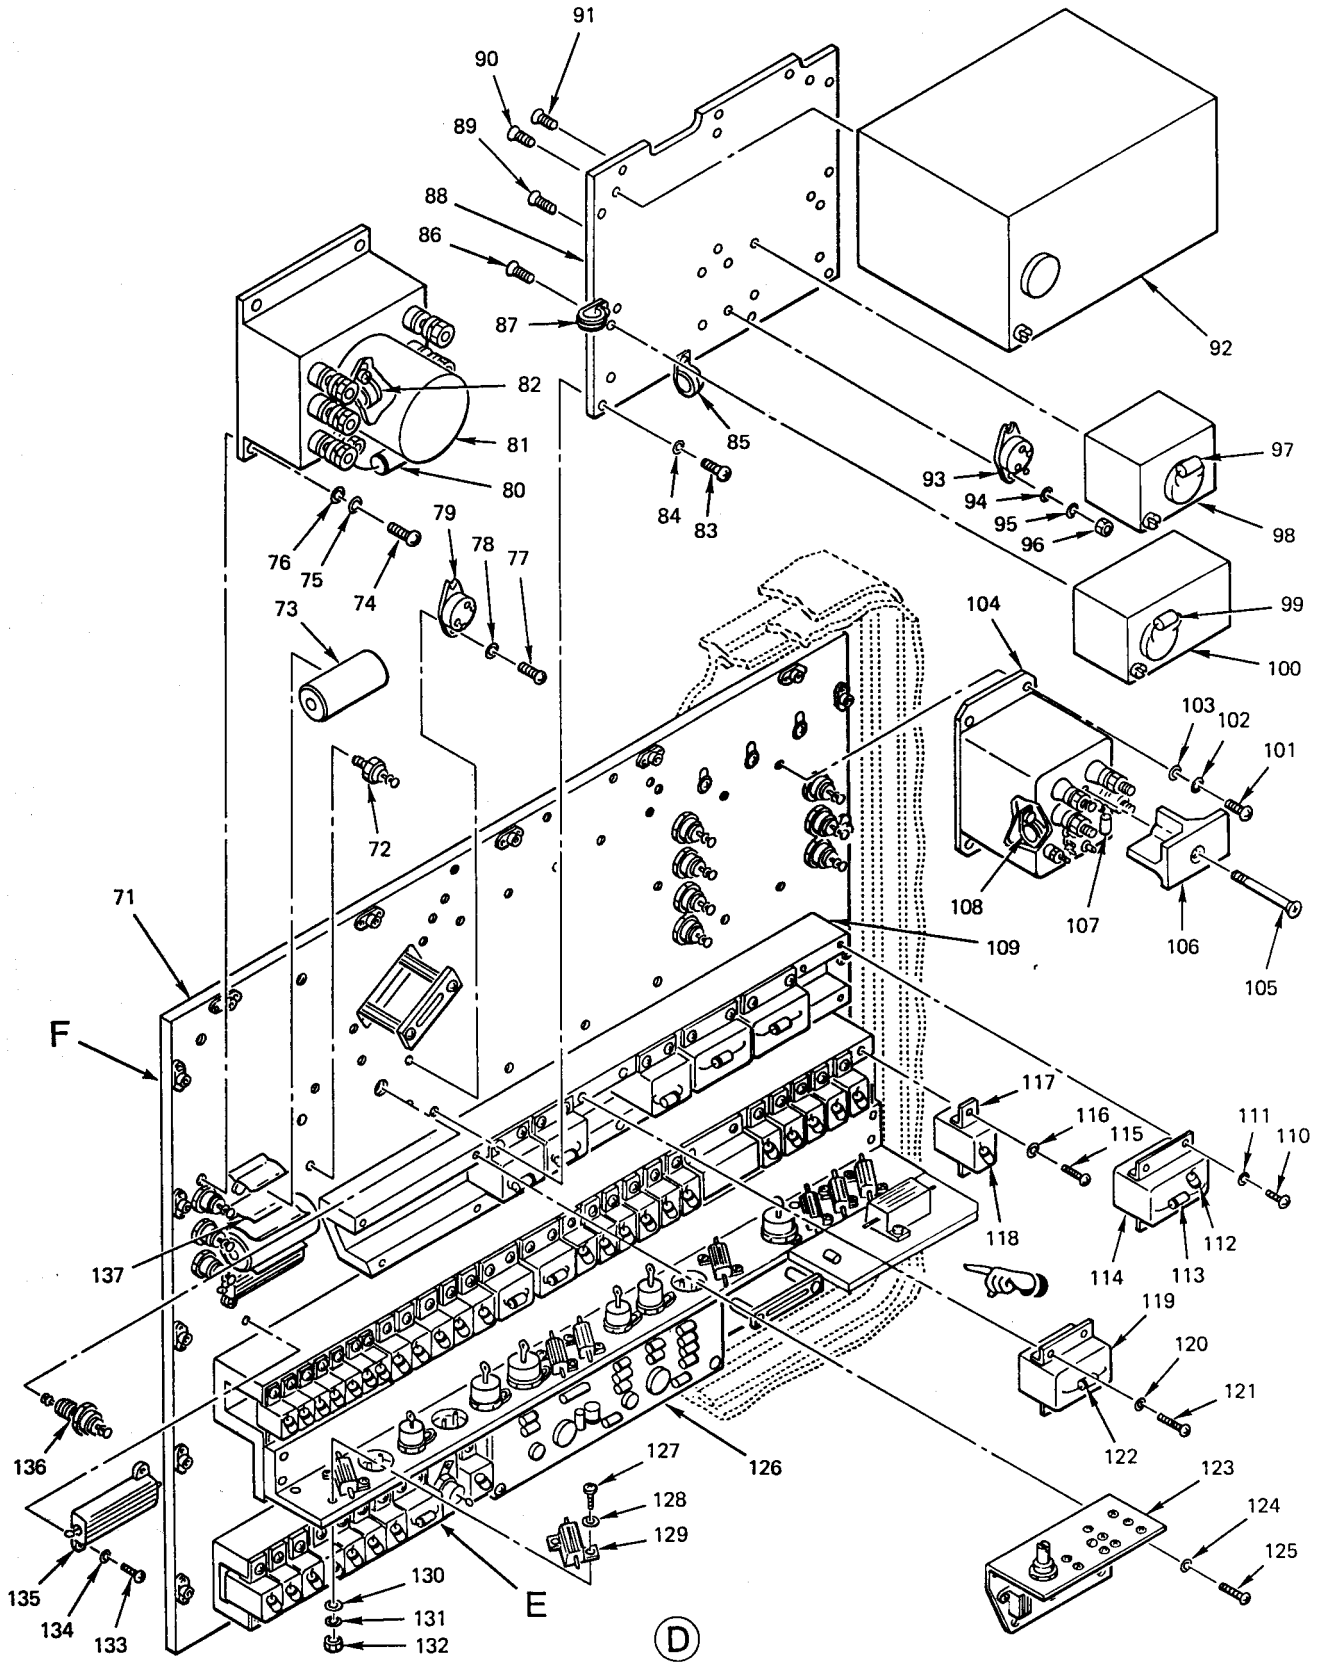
Power Supply Test Set Exploded View (Sheet 1 of 5)
